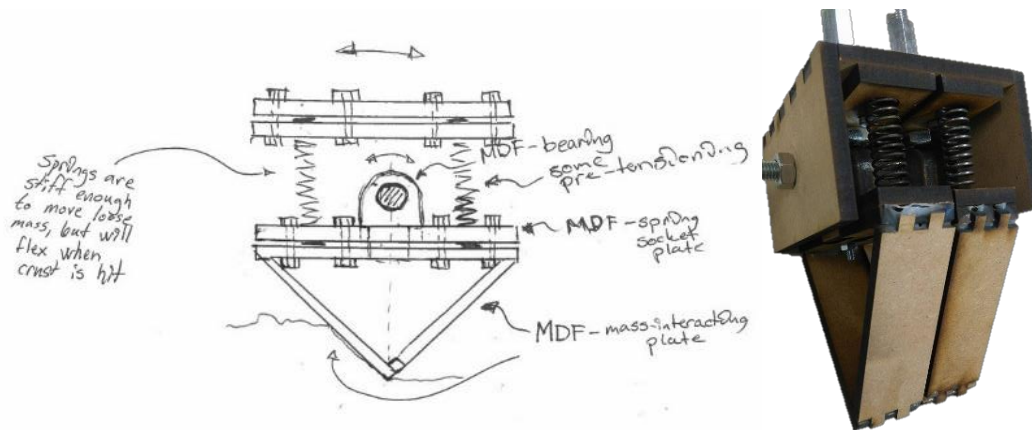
Initial sketch of the spring tool (left), and a prototype showing a variant with two segments (right).
